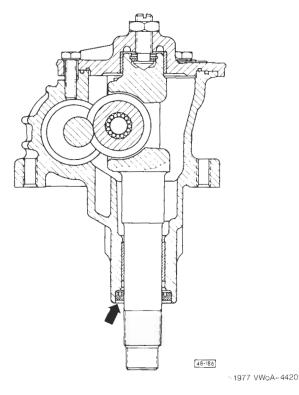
Roller shaft oil seal (arrow) on 1973 and later steering gearbox.
